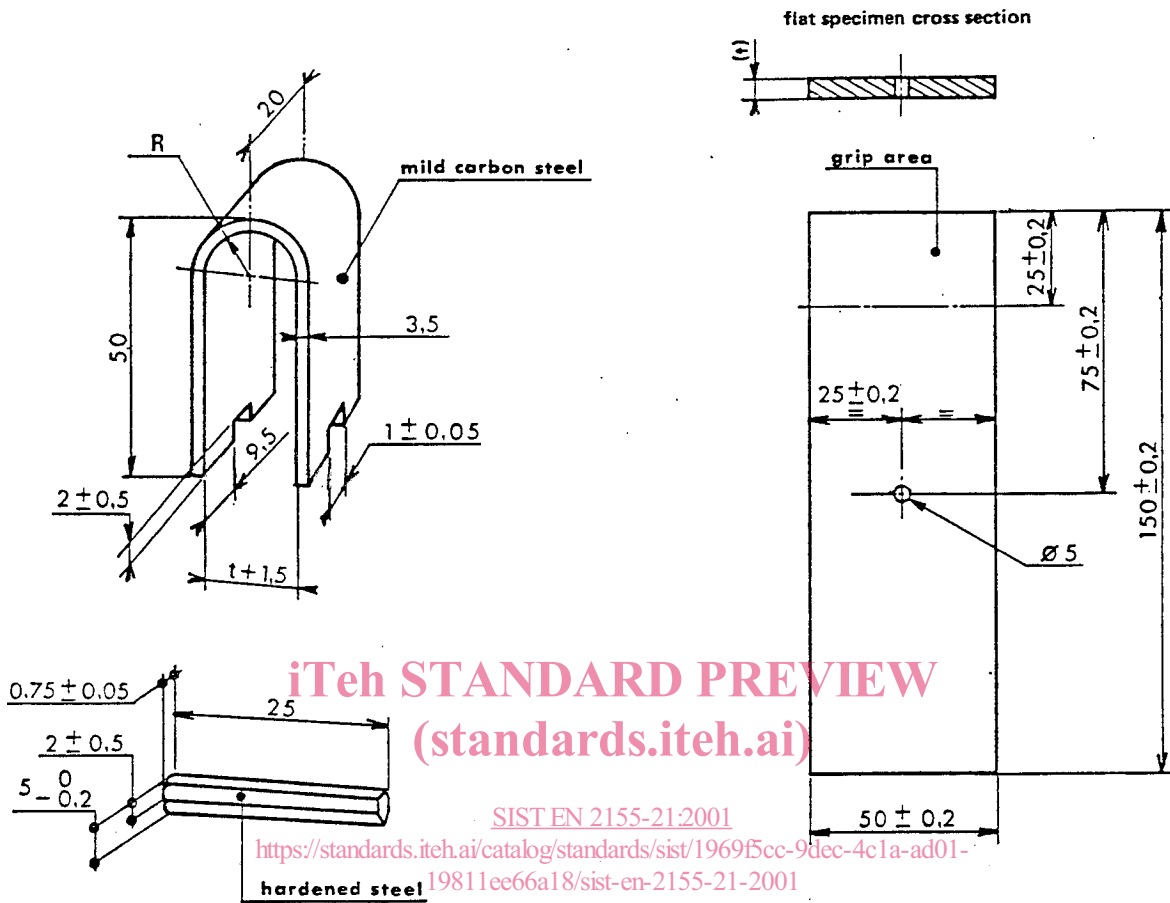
Driving yoke and blade for initiating cracks in toughness specimens
